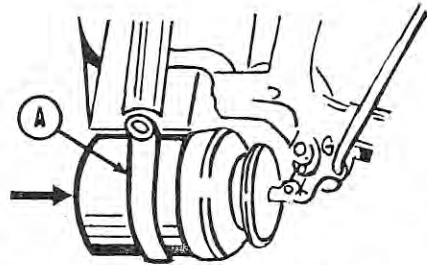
To adjust the choke solenoid on motors so equipped, loosen band (A), pull out manual choke control, and push solenoid through clamp as shown by arrow, until plunger bottoms.
